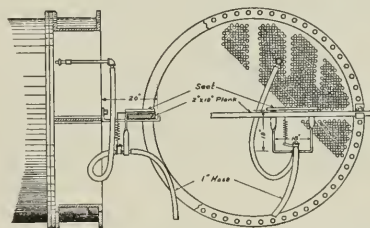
ARRANGEMENT OF EQUIPMENT FOR CLEANING CONDENSER BY RUBBER PLUGS OR SCRAPERS (HEAD REMOVED)
